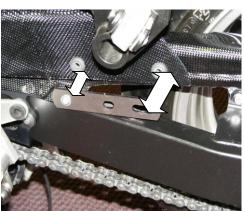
Left Hand Side – shows position of bracket underneath hugger.
